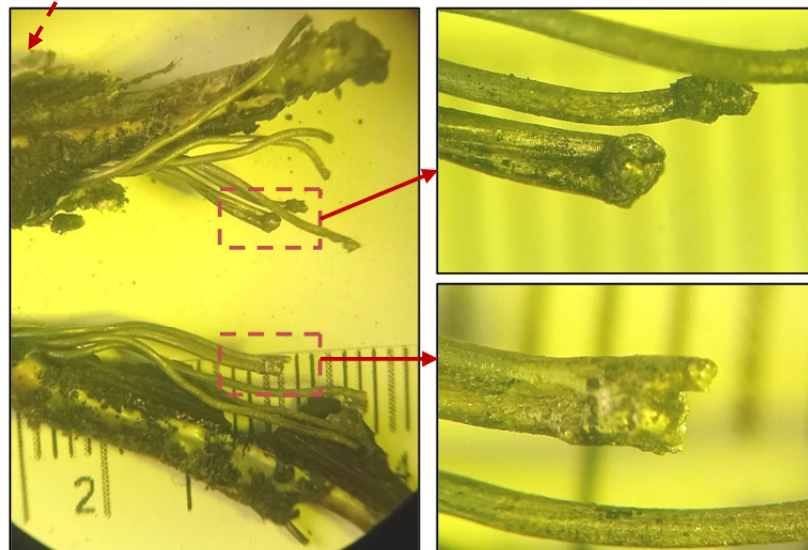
Enlarged image of a fragment of a heating cable with melting on the core wires
